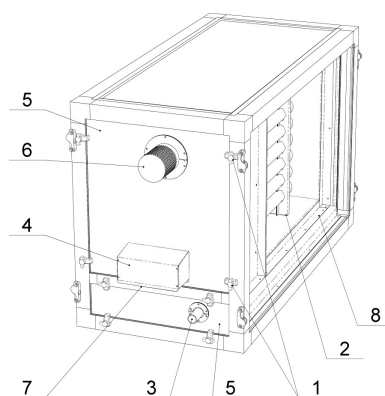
Gas-fired heater section, outdoor version.
